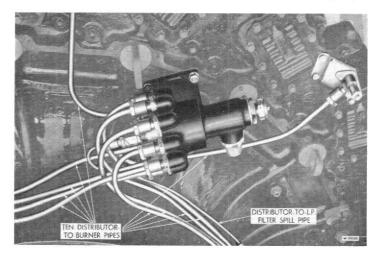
Fuel distributor; the pipes will have been removed as described on page 9.
